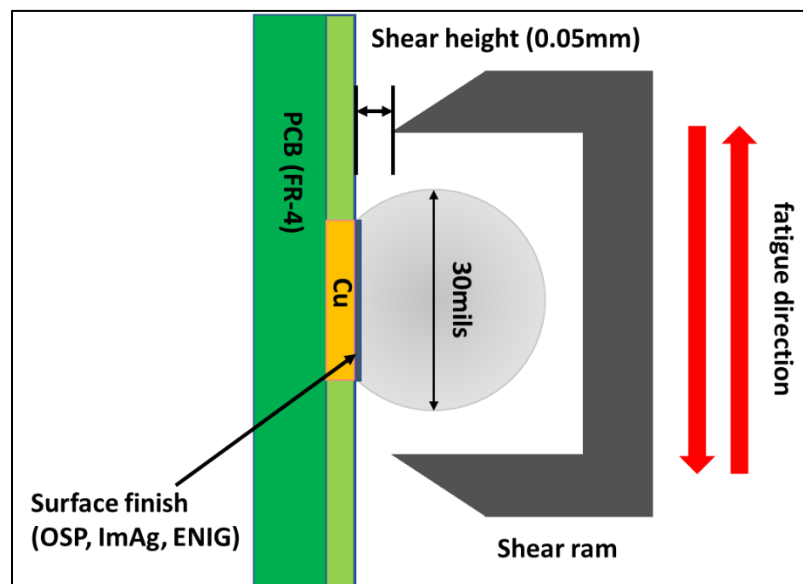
Schematic view of the shear fatigue fixture tip with a solder sphere
